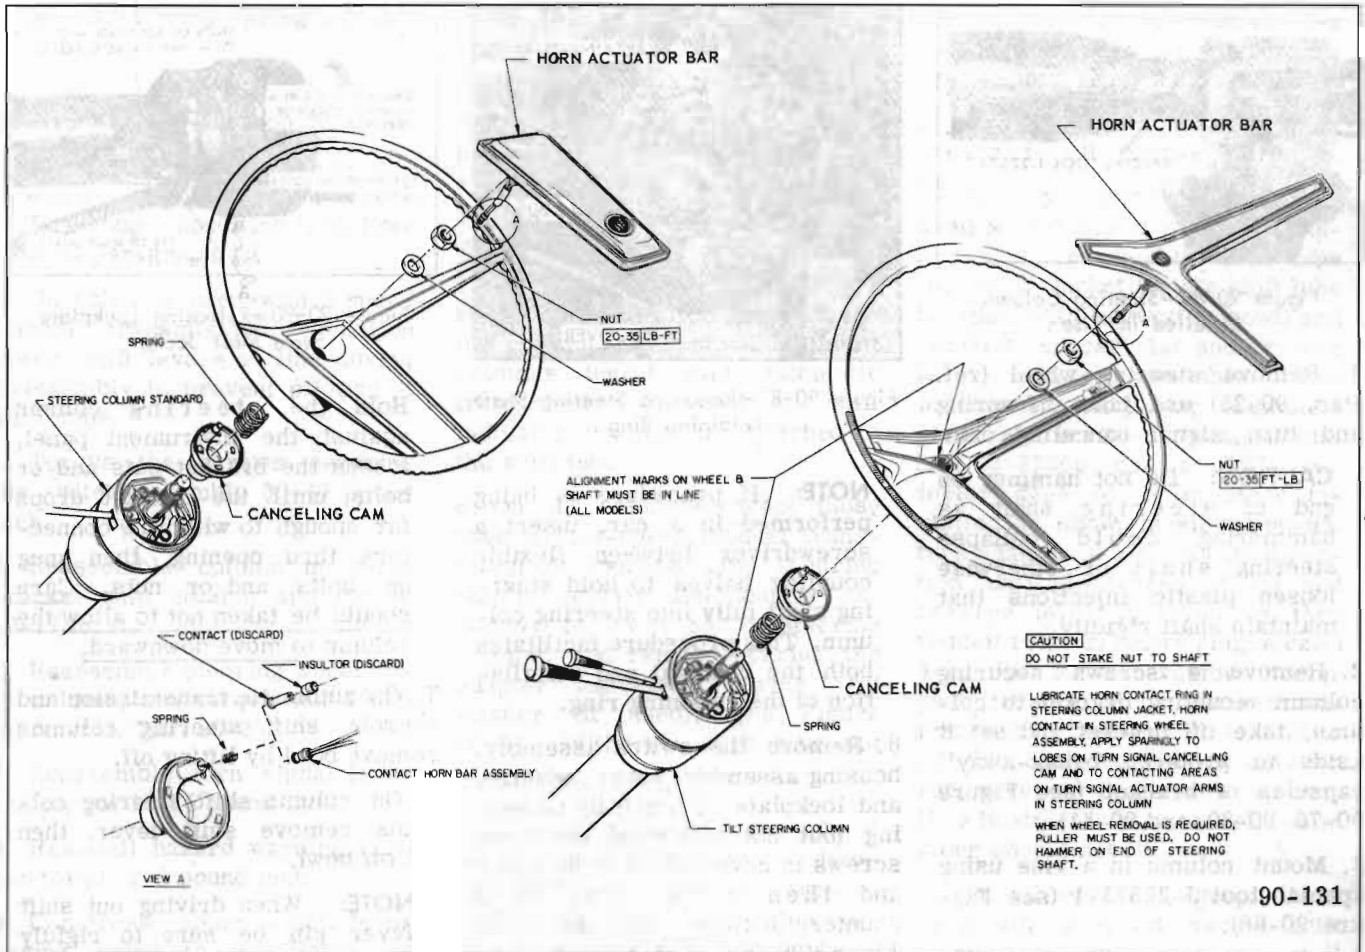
Steering Wheel Installation (43000-44000 Series)
